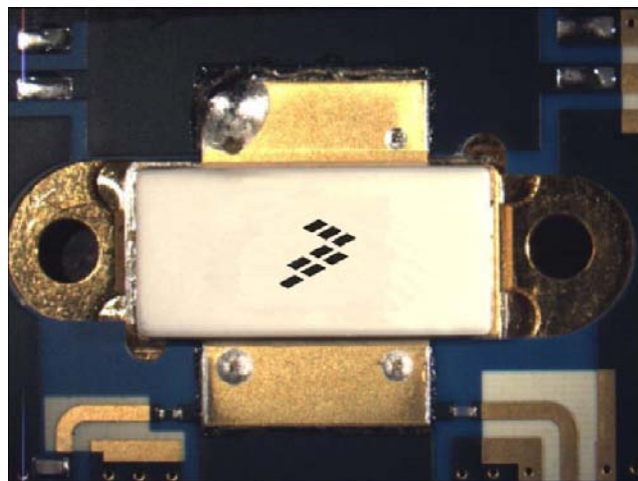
Typical Application of Freescale RF Power Device in Air Cavity Ceramic Package Soldered to a PCB as Well as to Carrier
